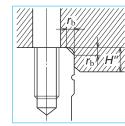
Shoulder for the Fig. 10 Shoulder for the ball slide datum surface
